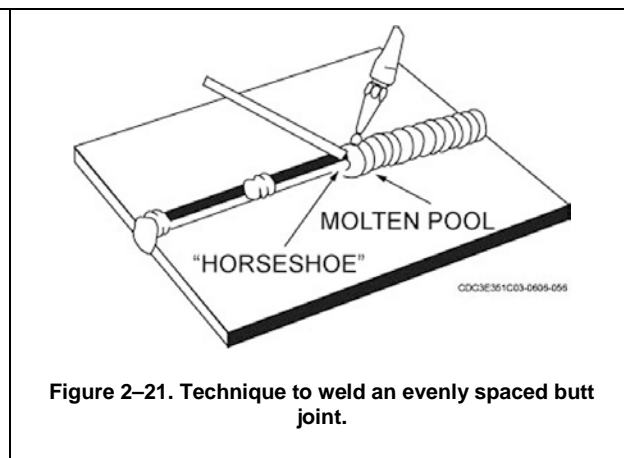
Technique to weld an evenly spaced butt joint.
